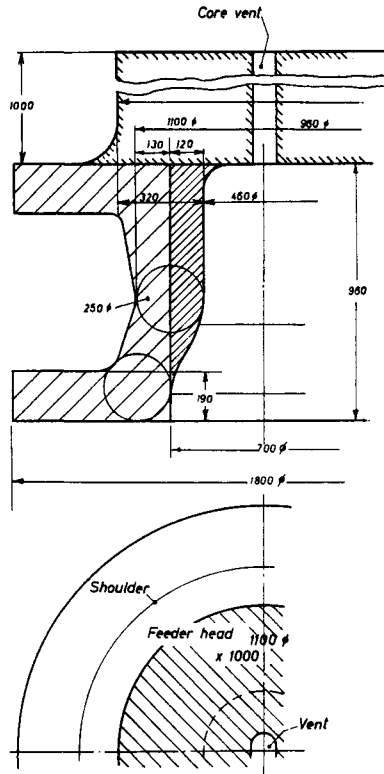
Double flange. 1st alternative: lower flange with Heuvers circles up to the feeder.
